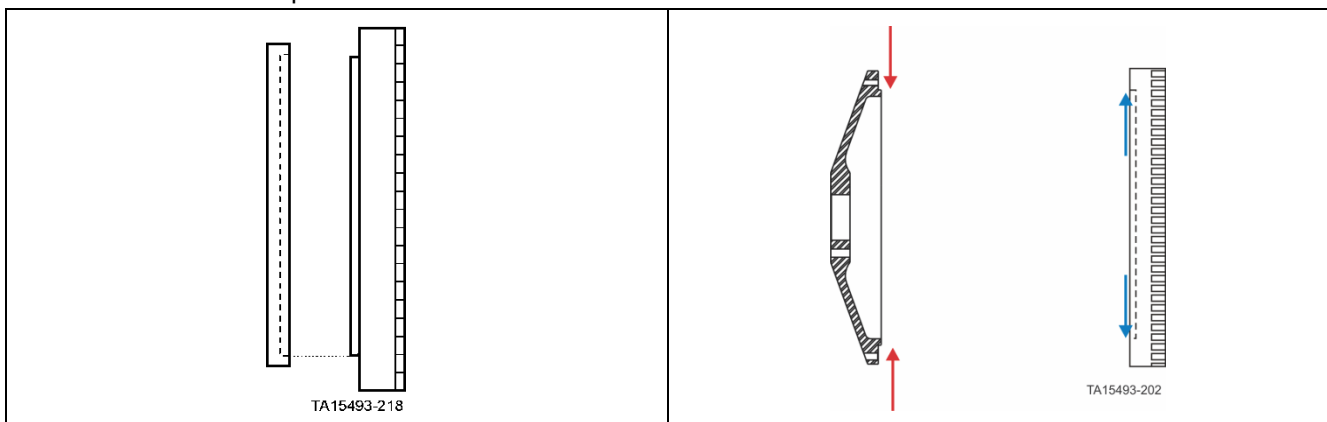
Setup adaptor to stator dimension = "adaptor to stator dimension" + 1/2 bearing endplay
